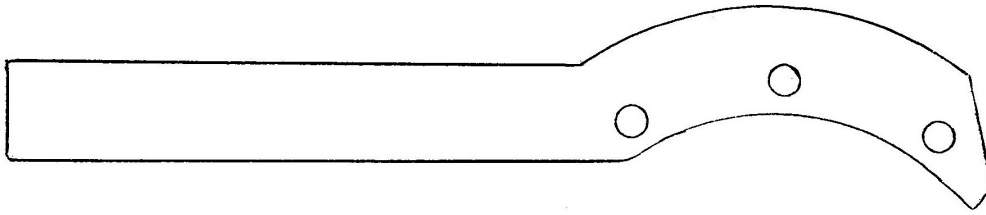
Tool for steadying torque tube adjacent to vice:- Bent from 1" x ½" mild steel, drilled  $\frac{3}{8}$ " clear to match three holes on the differential flange.
